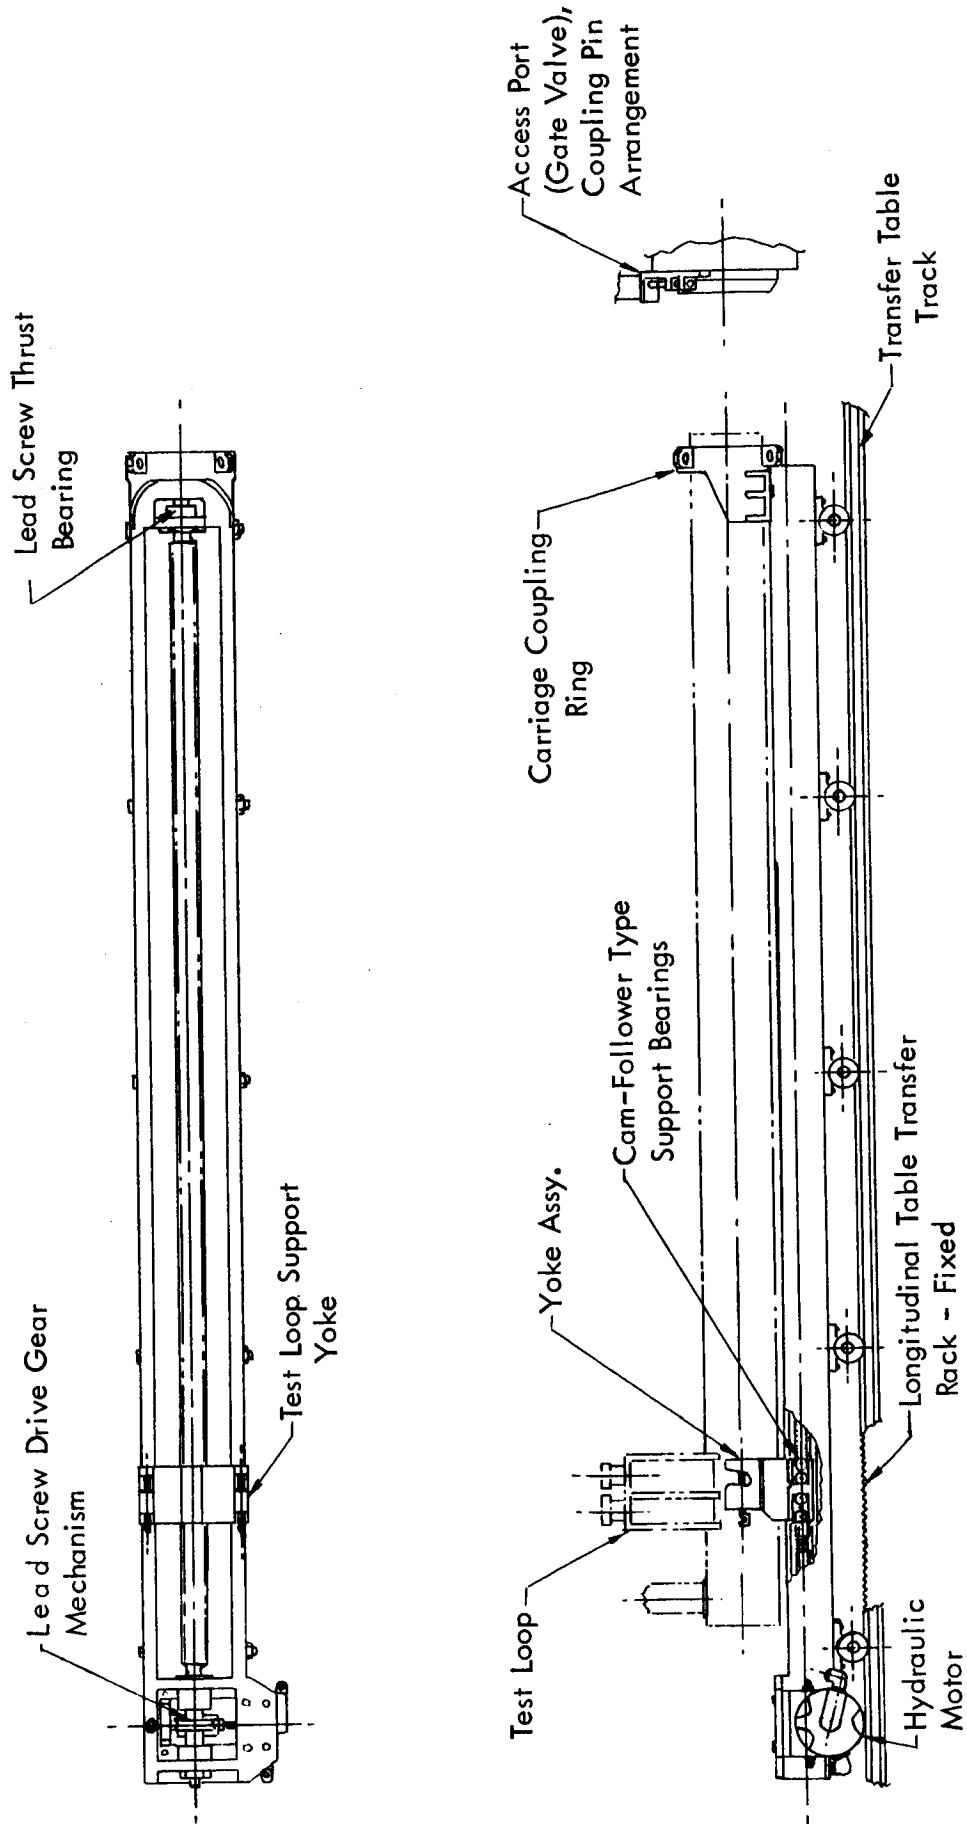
TEST LOOP CARRIAGE ASSEMBLY
